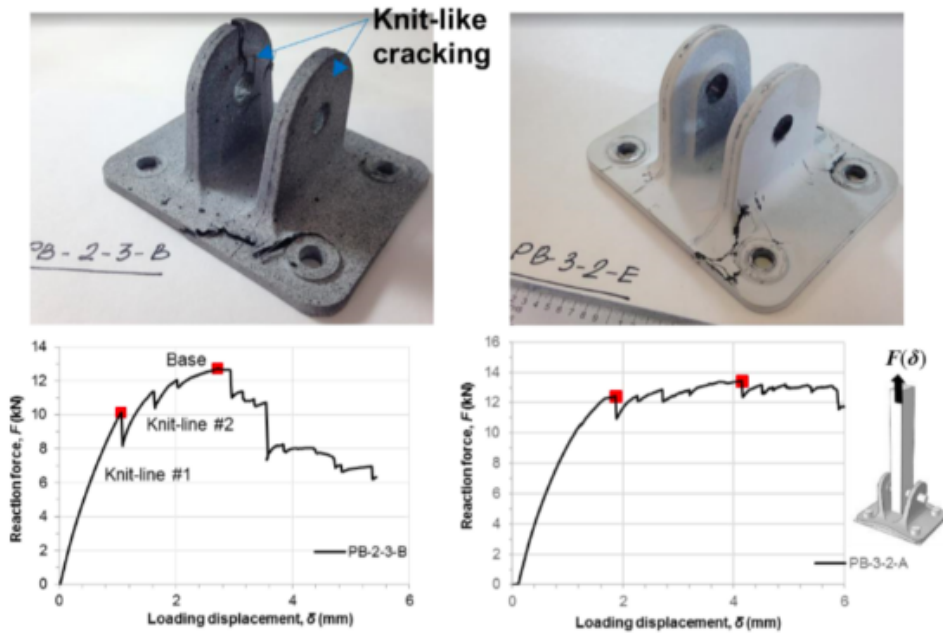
Failure in pin-bracket parts, *left*: molded-in pin holes *right*: drill-in pin holes, [26]
